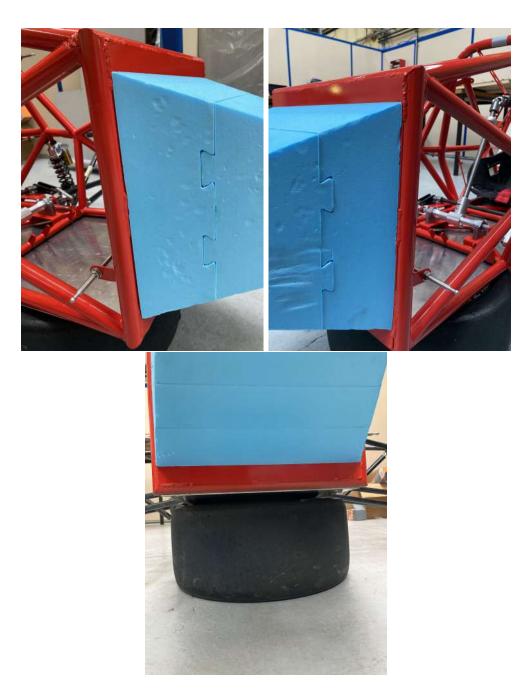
Welding points on the left, right, and lower sides
